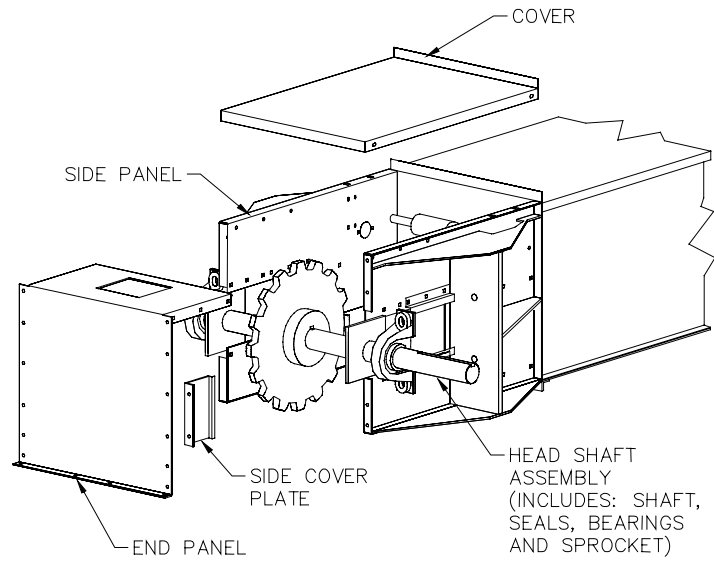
B, 26" Head Shaft Removal and Reinstallation
